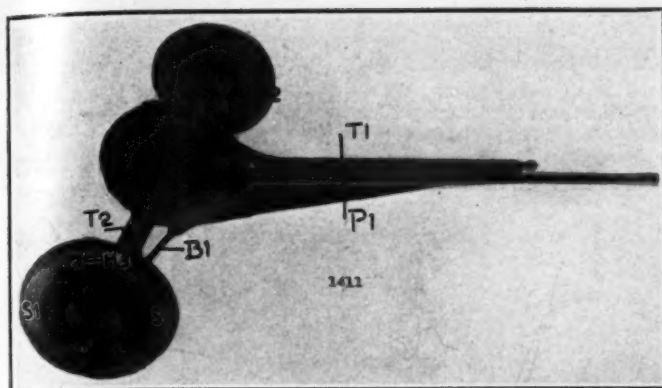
Live rear axle with bobstays, channel-section torsion tube and rotative perches
